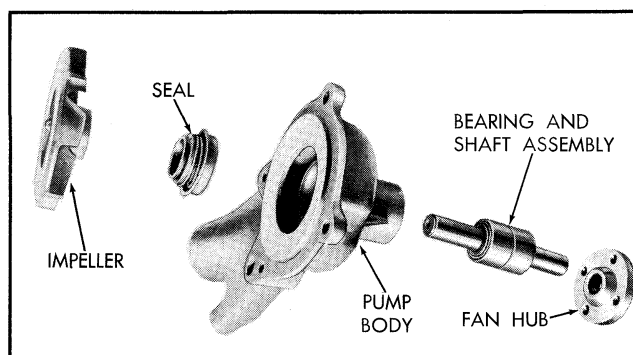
A-22 Water Pump - Exploded View (6 Cyl.)
